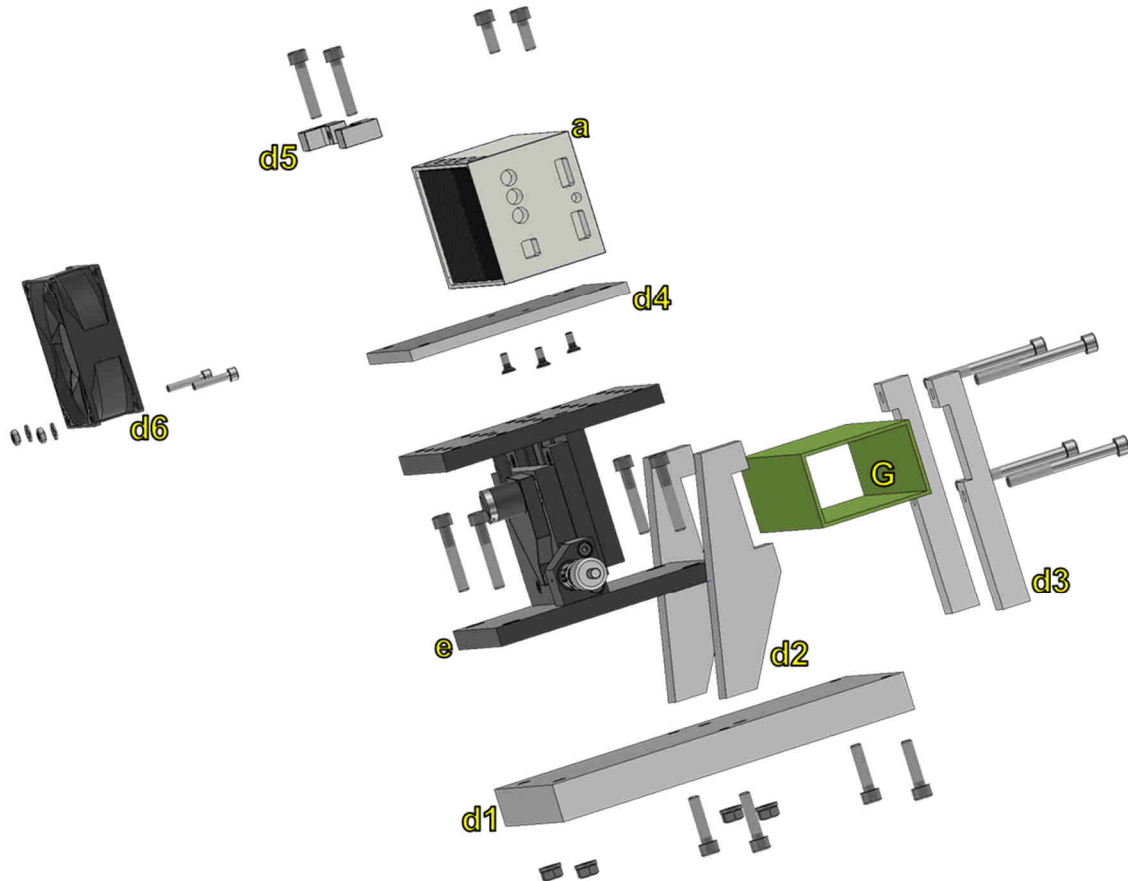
Expanded 3D presentation of the laser generation assembly. G: the cross section of the main frame of the NAC on which the assembly is clamped; a: iBeam 405 nm laser generator; d1: base piece of the mounting stage; d2: outer arm of the clamp that (relative to the NAC main chamber); d3: inner arm of the clamp; d4: adaptor piece on which the laser generator is directly mounted; d5: adaptor piece on which the cooling fan is directly mounted; d6: Ø 80 mm cooling fan; e: MELLEES GRIOT height adjustable mounting table for laser system. Tightening pieces are of the DIN norm and are therefore not specified. The MELLEES GRIOT table is not further expanded because it is used as received.
